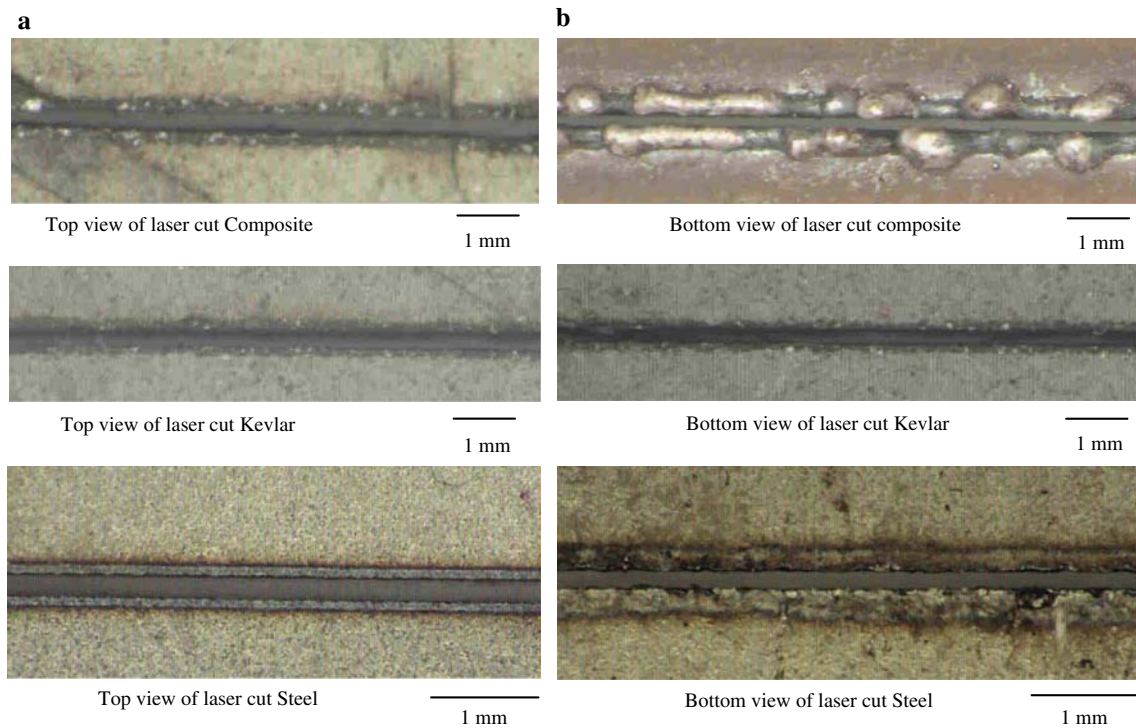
(a) Photographs of top view of laser cut sections. (b) Photographs of bottom view of laser cut sections
